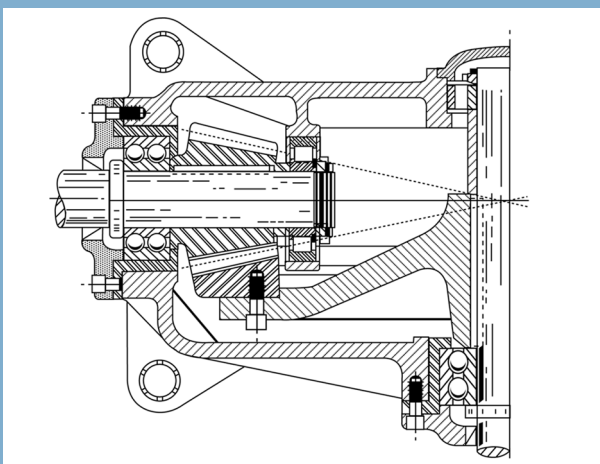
Typical straddle mounting for both members of a spiral bevel pair
